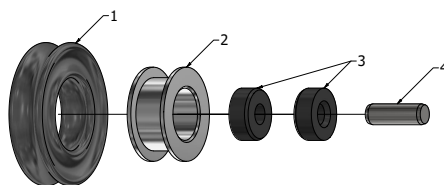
Exploded view of v2020 subwheel. 1) X-Ring. 2) Roller body. 3) Friction bearings. 4) Dowel pin.
